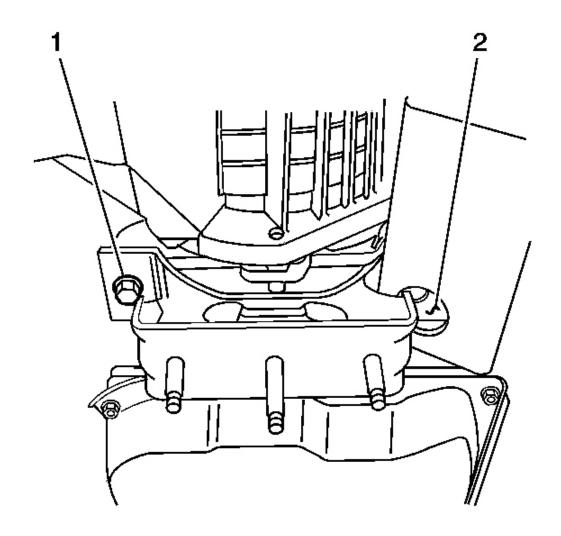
View Of Transmission Mount Courtesy of GENERAL MOTORS CORP.
